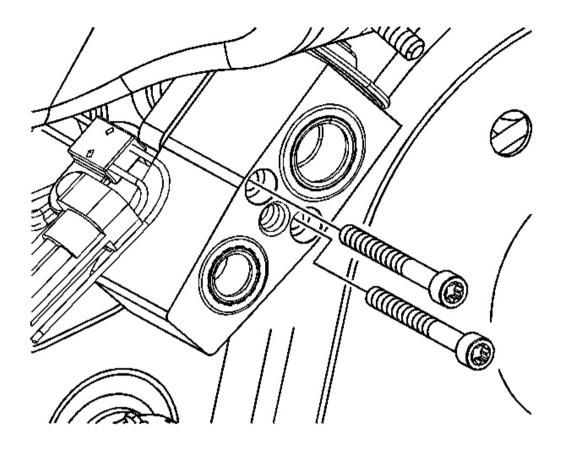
Evaporator Outlet Hose, Liquid Line & TXV Courtesy of GENERAL MOTORS CORP.
